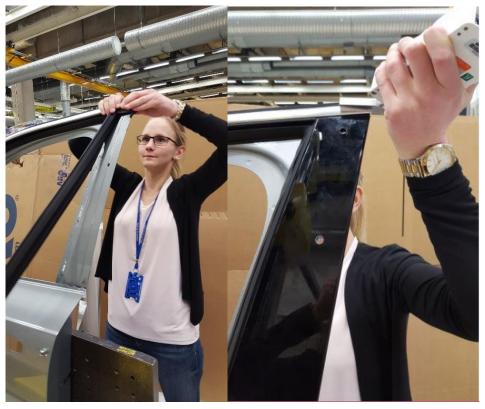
Left: Assembly of GRS. Right: Force estimation of assembly
